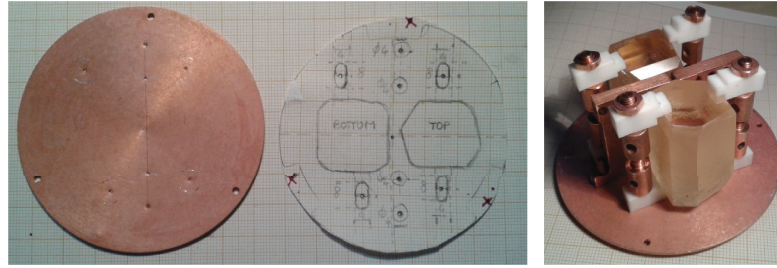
Bolometer holder preparation, as an example of mounting design.
